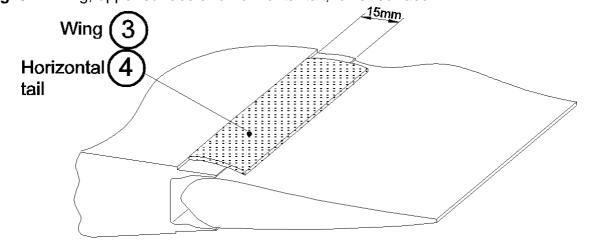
Wing, upper surface and horizontal tail, lower surface
